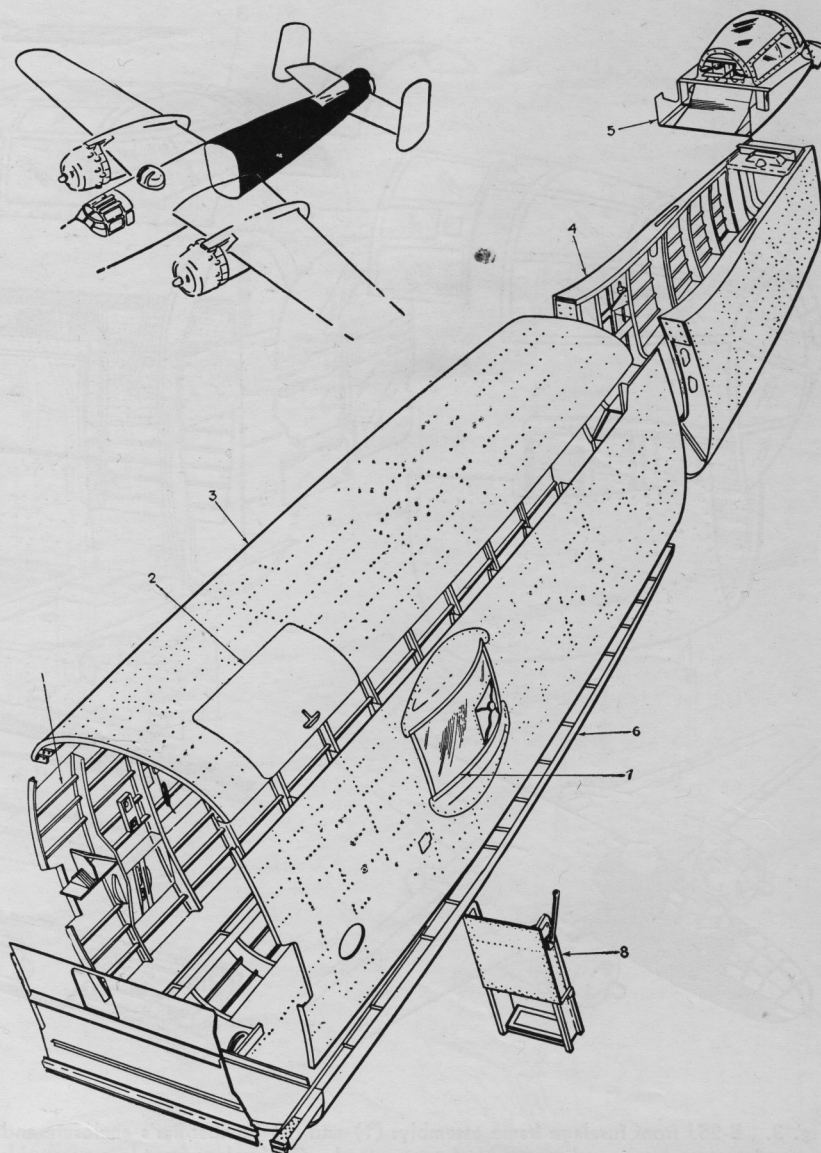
Fuselage rear frame assembly: (1) side frame assembly; (2) life-raft door; (3) top assembly; (4) and (5) tail gunner's compartment and canopy, respectively; (6) bottom assembly; (7) waist-gun window; (8) rear exit hatch.
